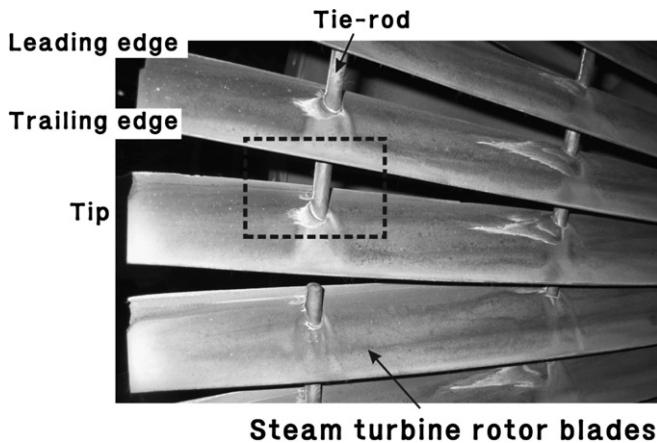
A photograph of steam turbine rotors showing rotor blades connected by a circular tie-rod (from Seochun Power Plant, Korea Midland Power Co., South Korea).
